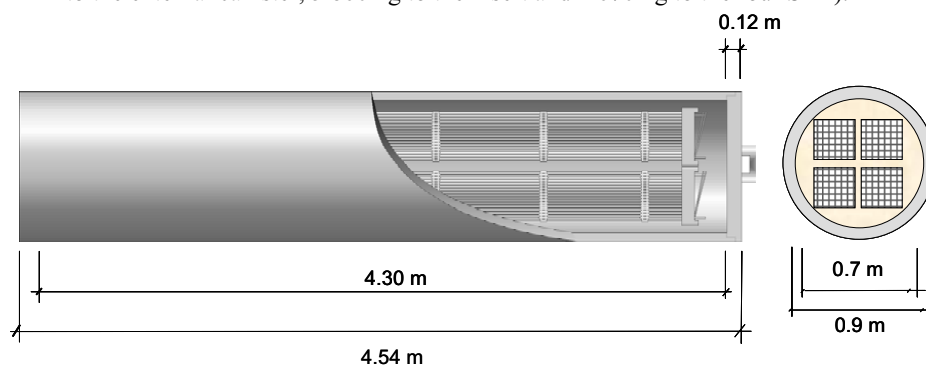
Scenario A1: HLW package for 4 UOX spent fuel assemblies
